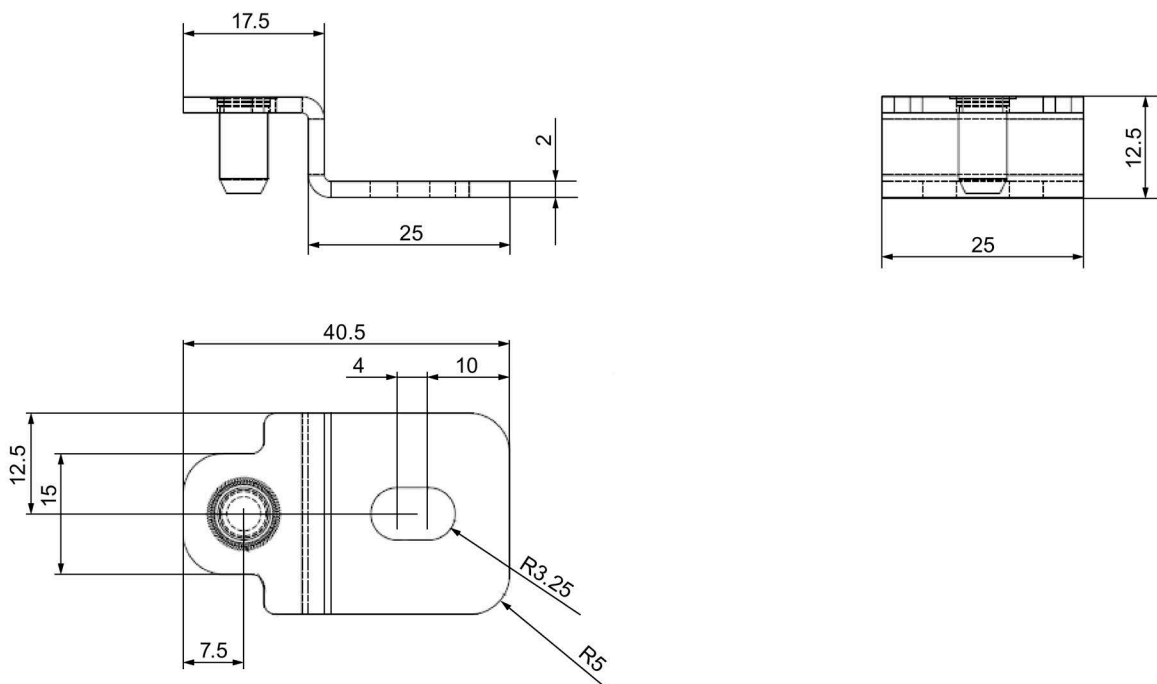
Dimension drawing mounting for SIMATIC RF68xT
